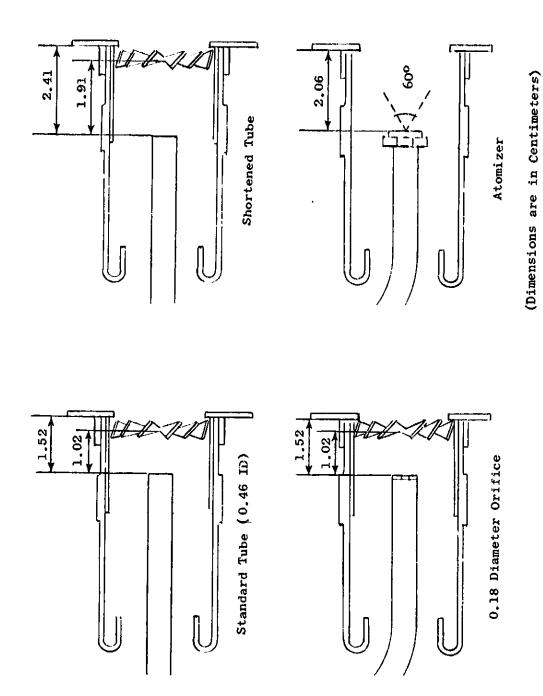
Fuel Injector Configurations, Swirl-Can Combustor.
